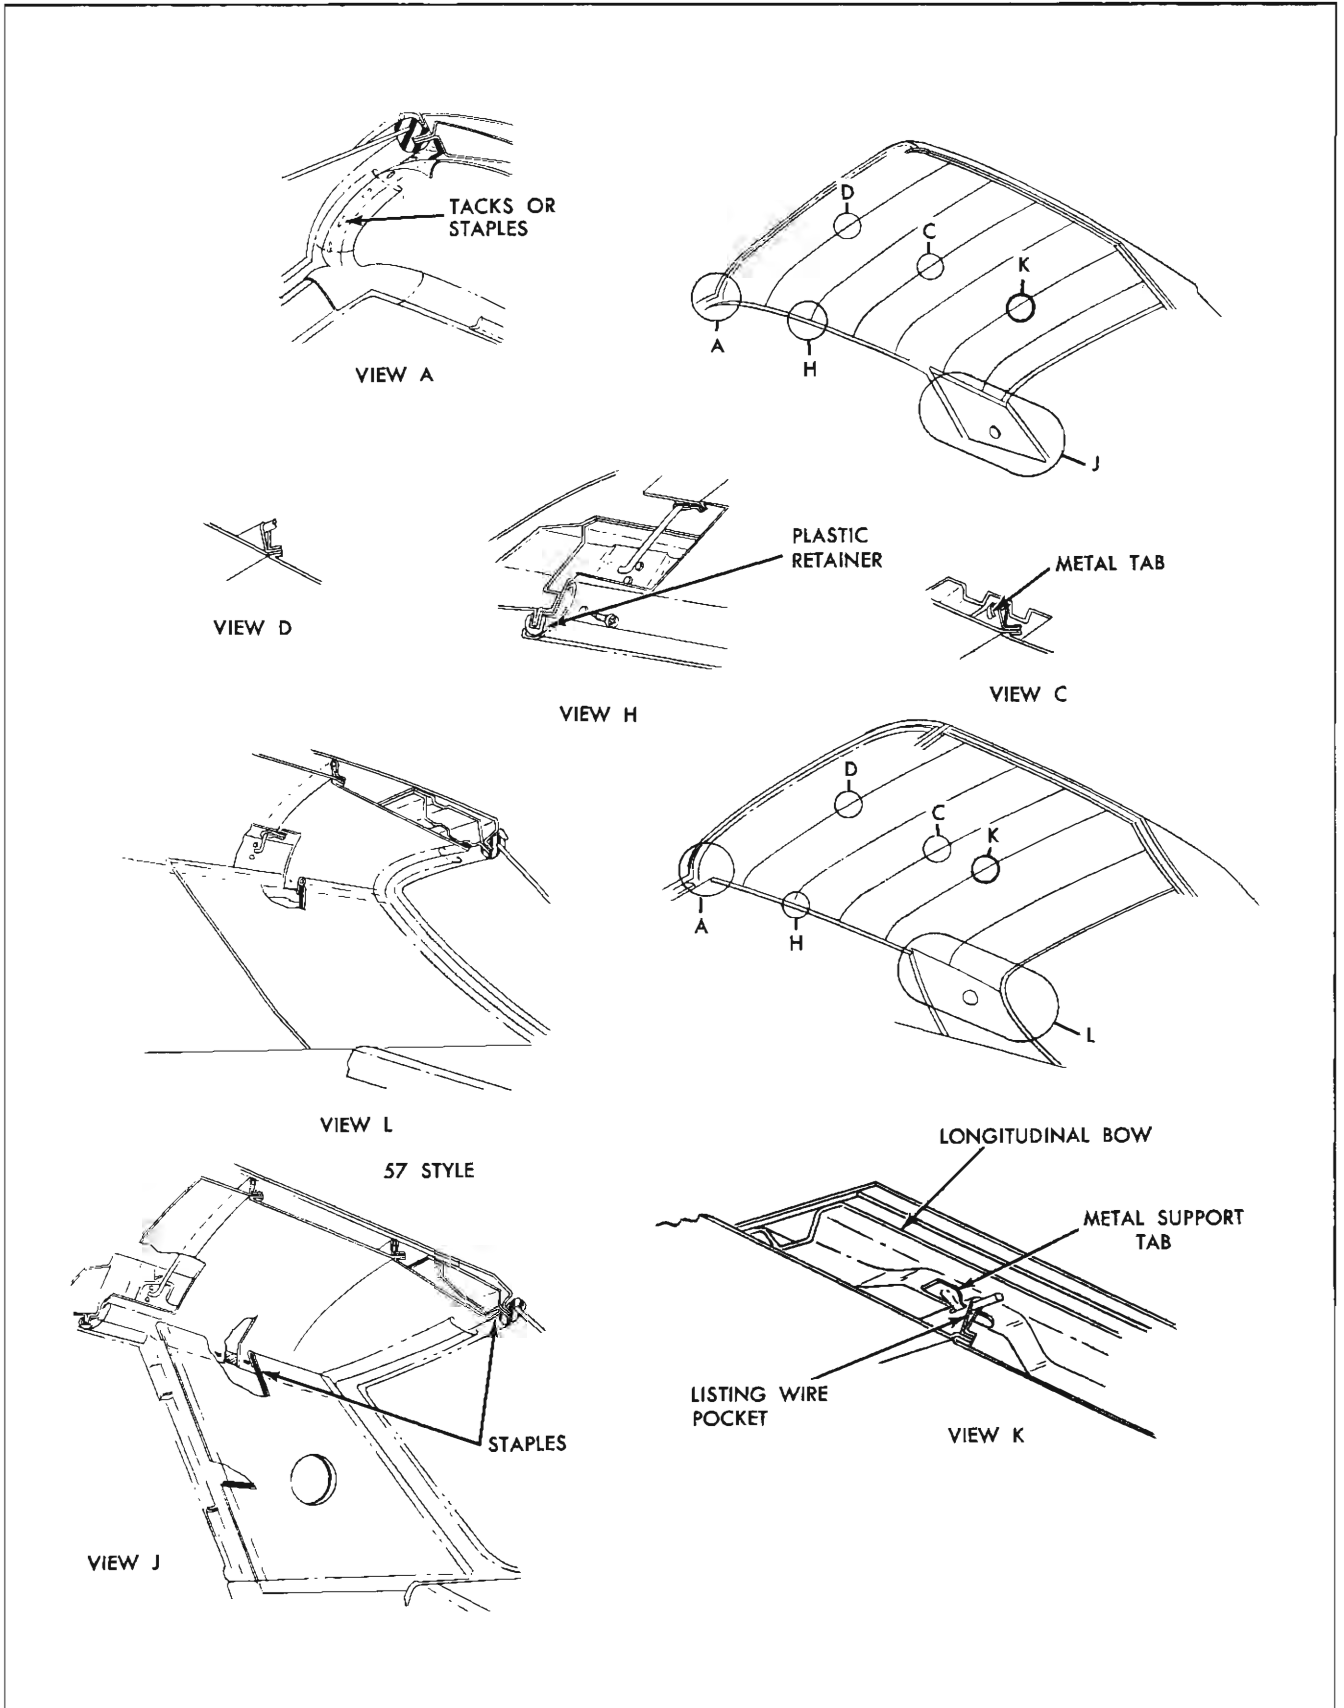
Headlining Installation - 39 and 57 Styles
